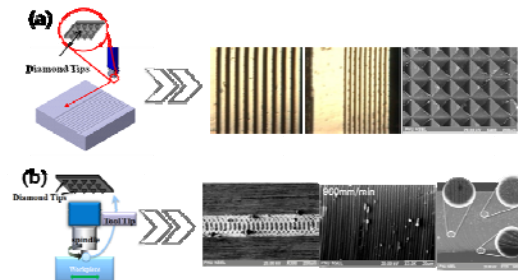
machining method using multi-array diamond tips, (a) Shaping based scratching machining using multi array tips, (b) Spindle based scratching machining using multi array tips
